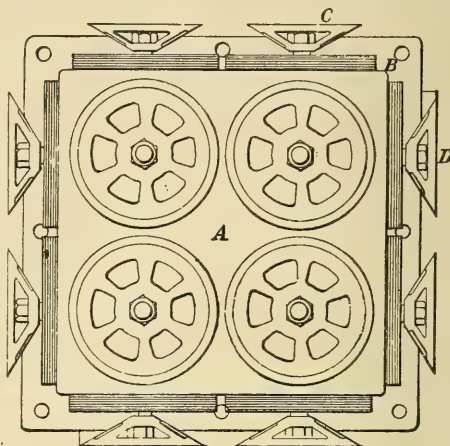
Box Valve Seat with square sides, arranged for twelve Valves for Air Pumps.
